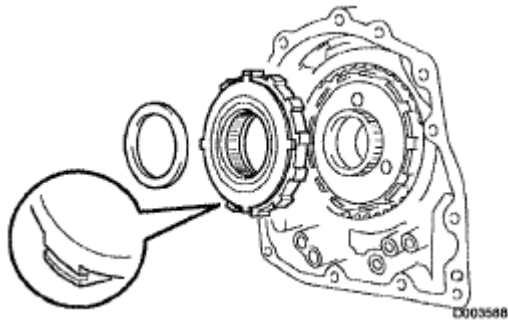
Installing 1-Way Clutch And Bearing To 1-Way Clutch Sleeve Outer
